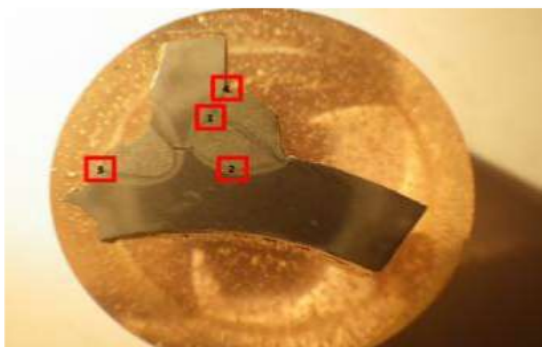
Visual Inspection of Waterwall Tube Boiler Failure.
